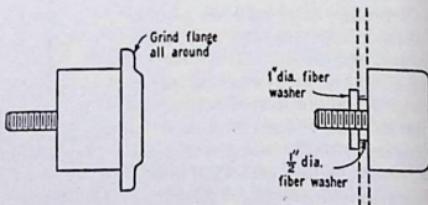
Method of mounting meters on the outside of a receiver panel.
